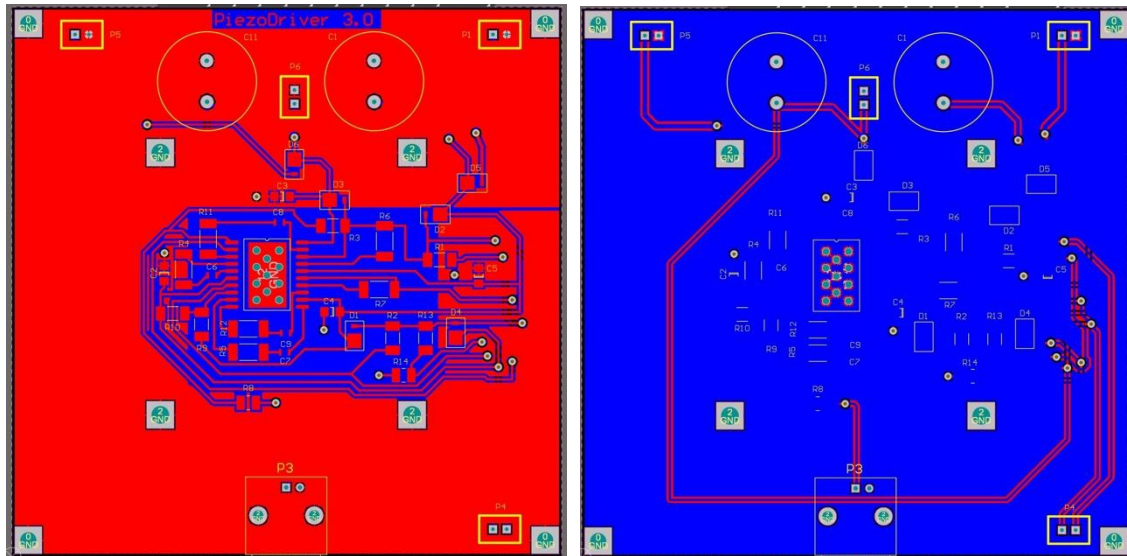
PCB design using Altium of the top view (left) and bottom view (right)
